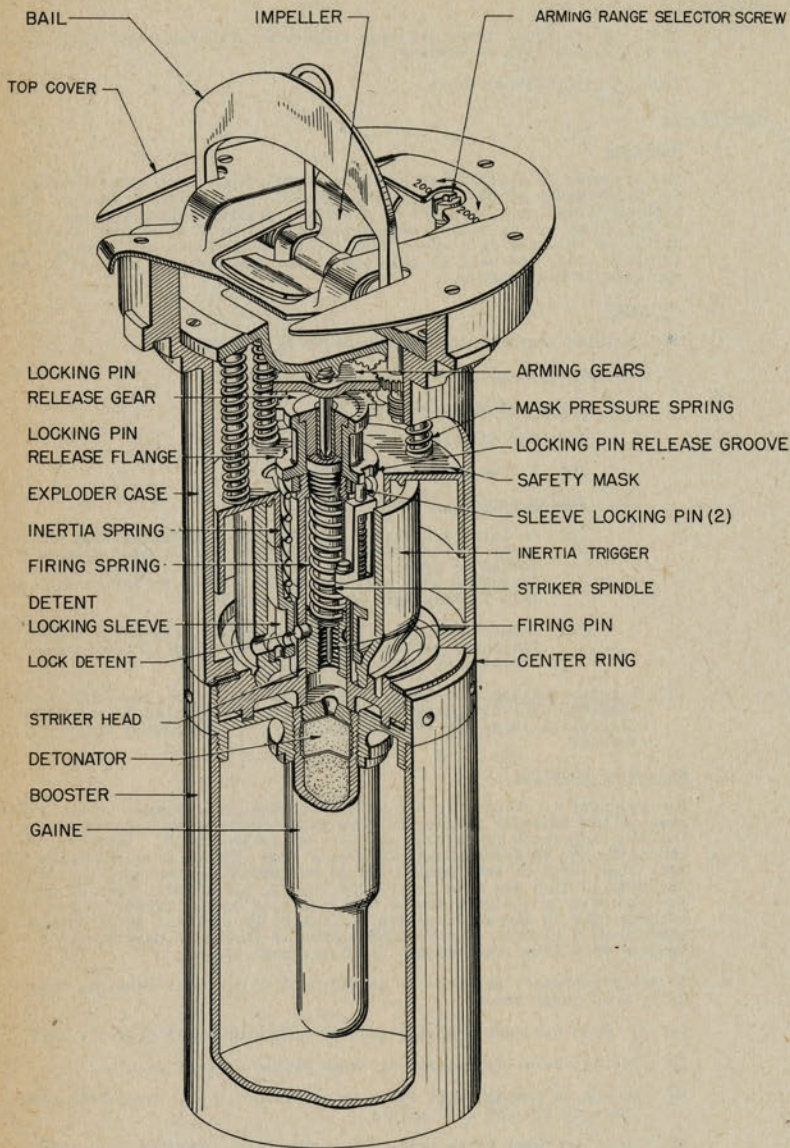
Type 90, Exploder, Sectional View in Elevation
